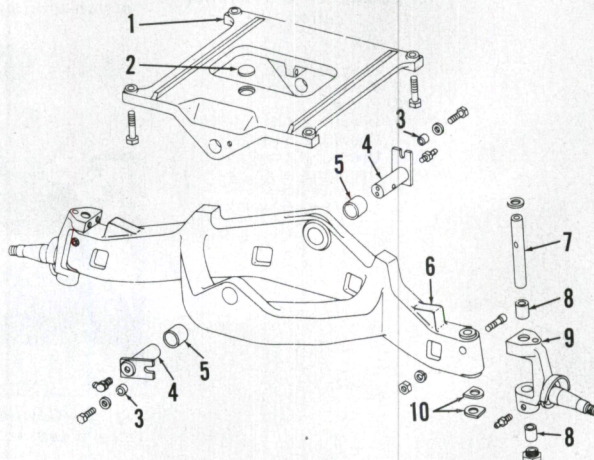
Exploded view of adjustable front axle and pivot bracket assembly.
